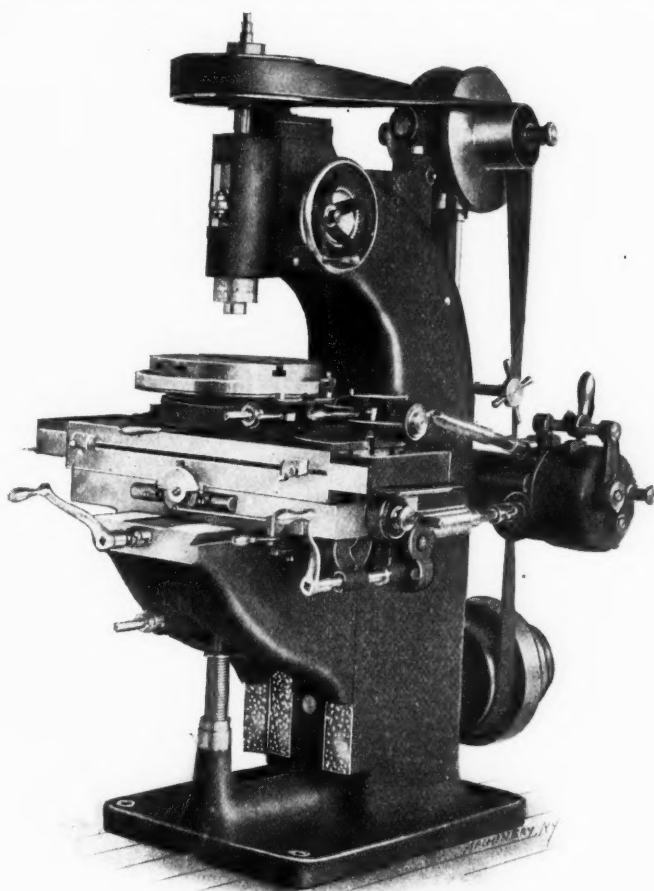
Becker Milling Machine with Improved Rotary Milling Attachment
